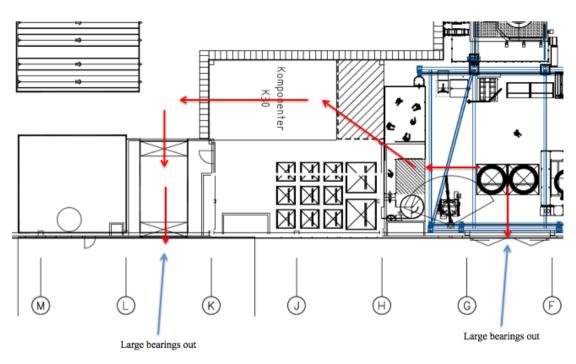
Consolidated floor bearing capability, Source: SKF (modified)
